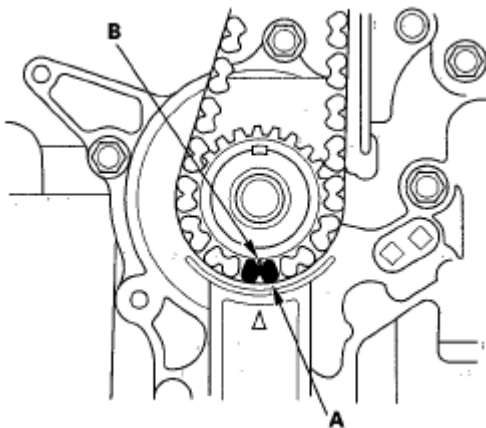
Locating Colored Piece & TDC Mark On Crankshaft Sprocket
